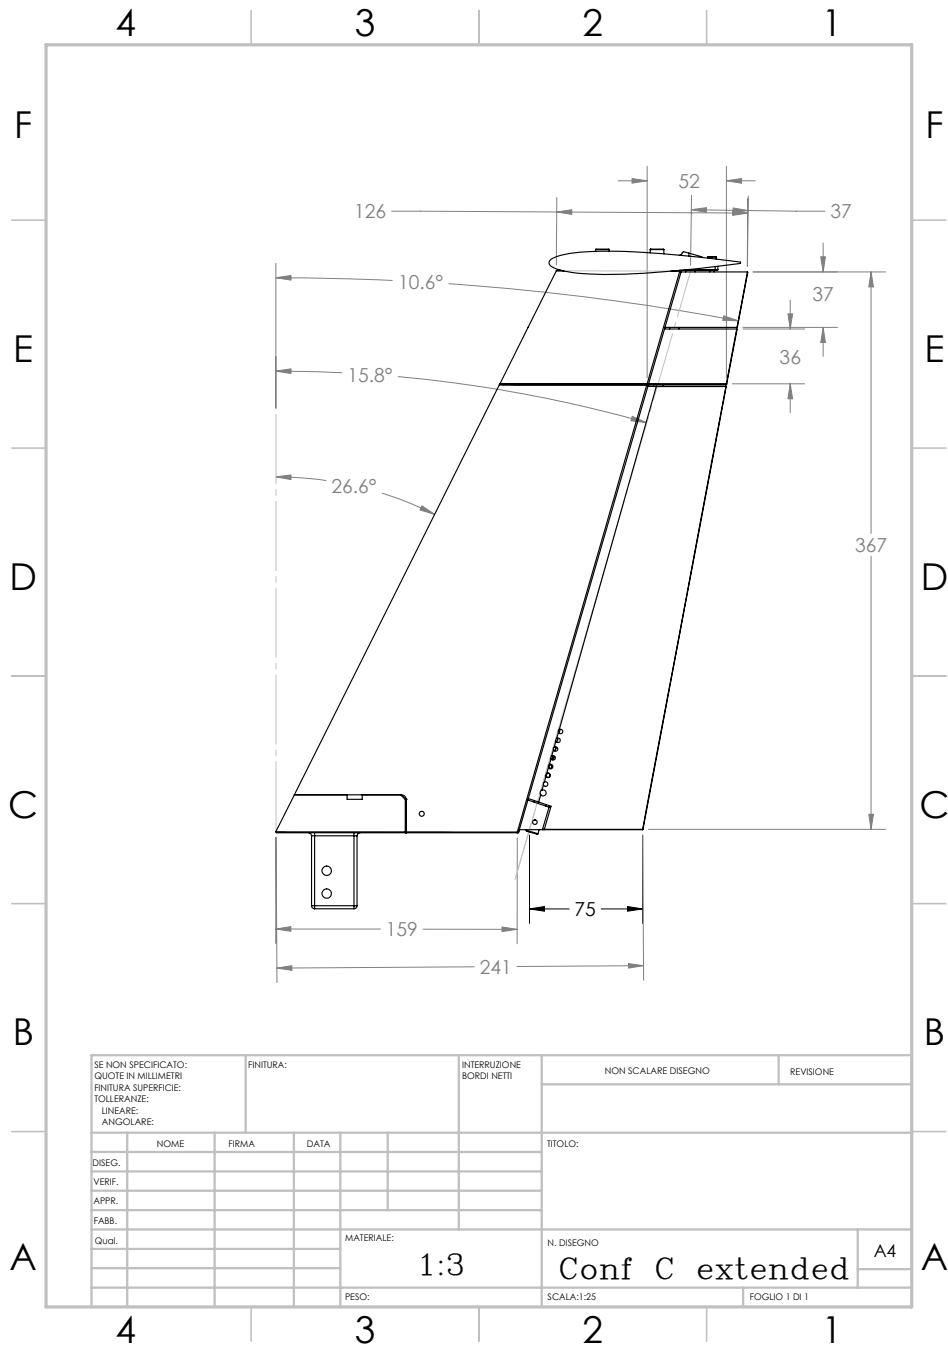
CAD model of tail assembly C with $R = 2.0$.
